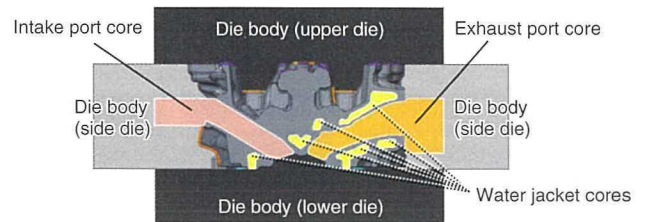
Explanatory Diagram of Die Body and Core Assembly
